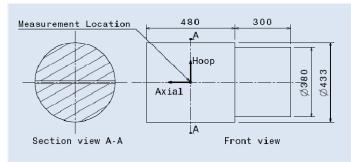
Sketch of the steel roll mini mock-up and DHD measurement location (All dimensions in mm)
